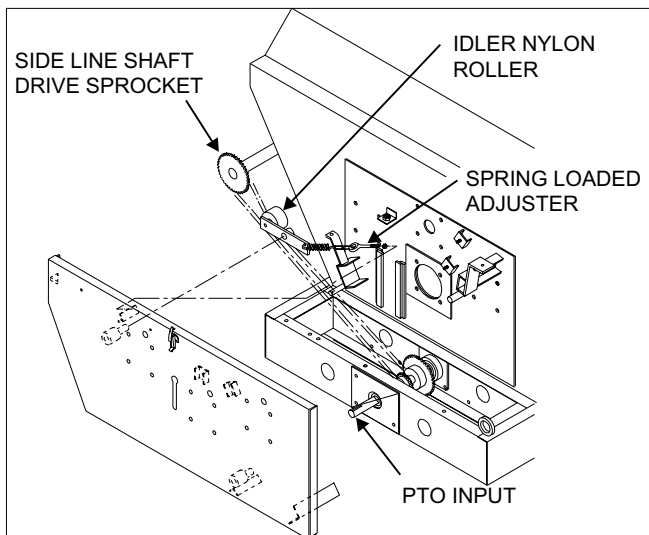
SIDE SHAFT CHAIN DRIVE
